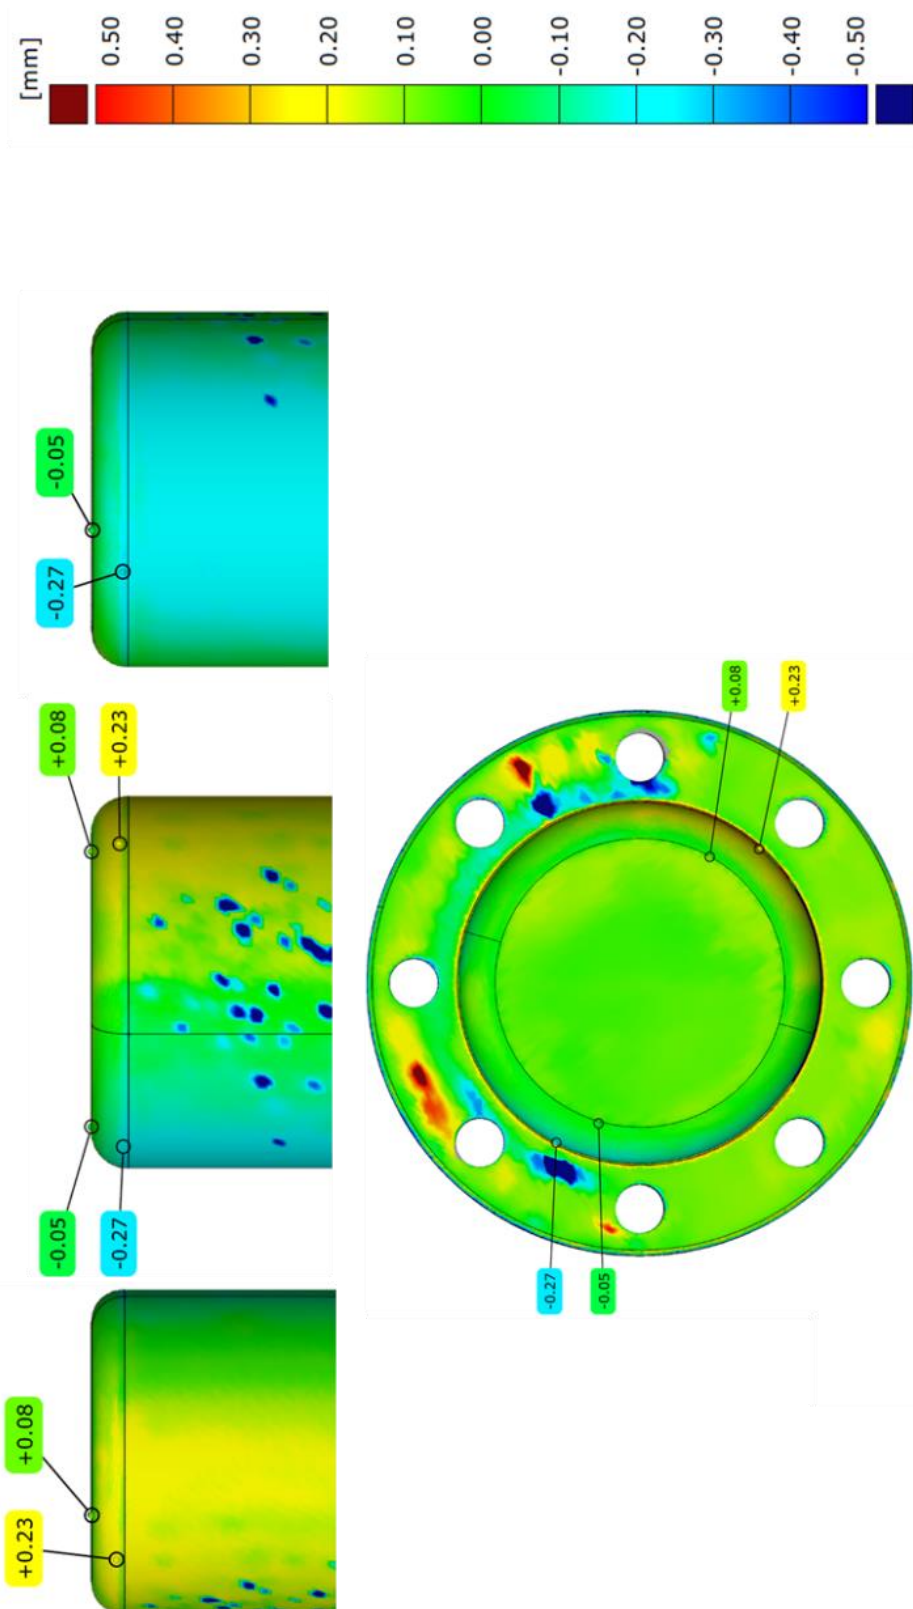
Variance between the CAD drawing and the optical measurement of the punch before the deep drawing tests
